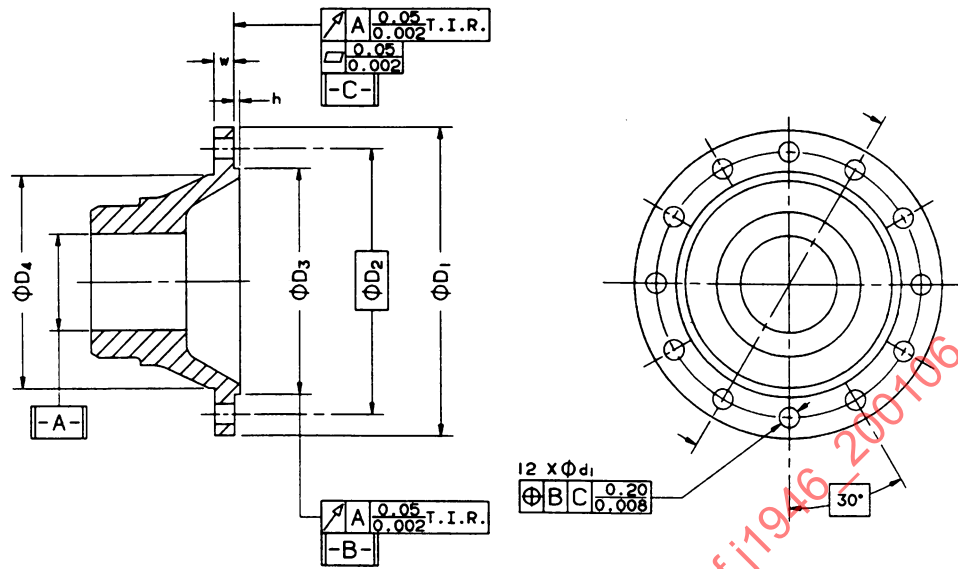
TYPE A COMPANION FLANGES—TRUE POSITION, FLATNESS AND RUNOUT TOLERANCES—mm/in
